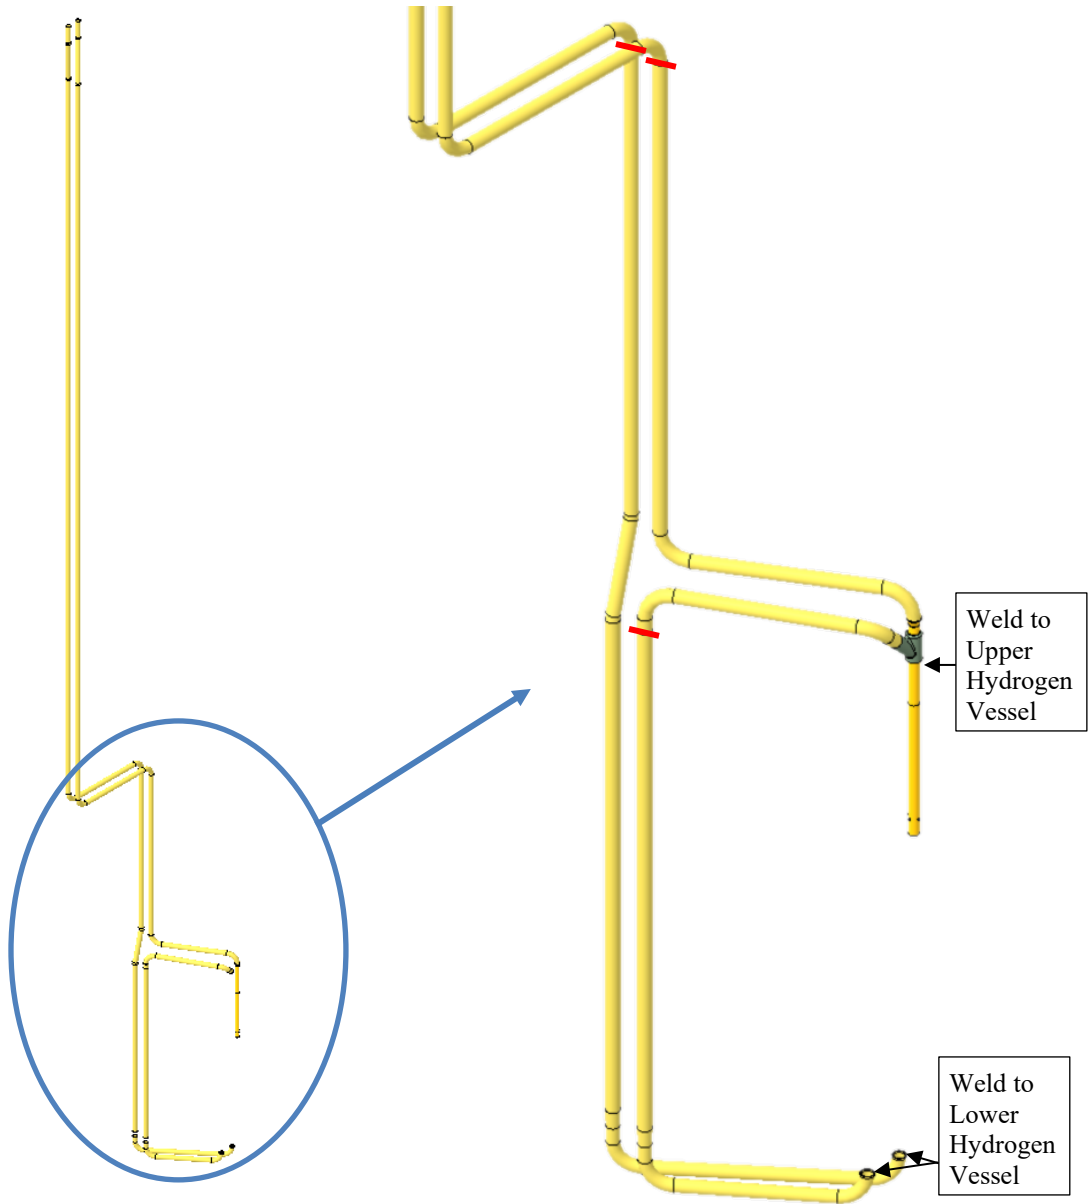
Hydrogen piping layout with divisions (to be welded at final assembly) shown in red.
